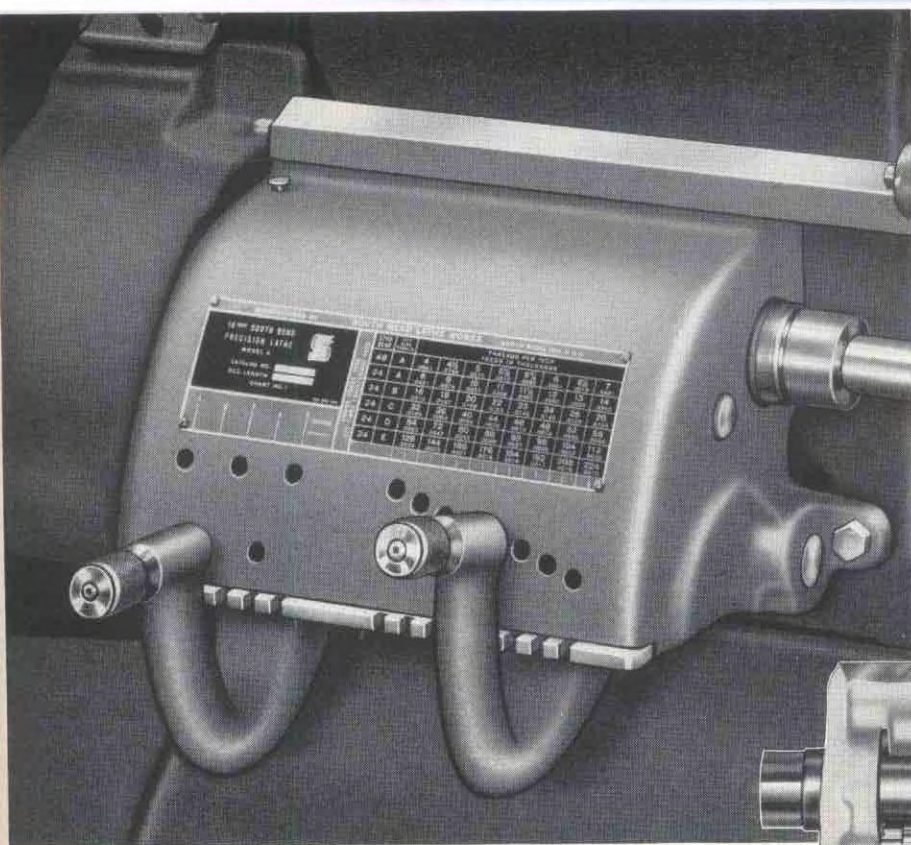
Improved Quick Change Gear Box for South Bend Lathes
